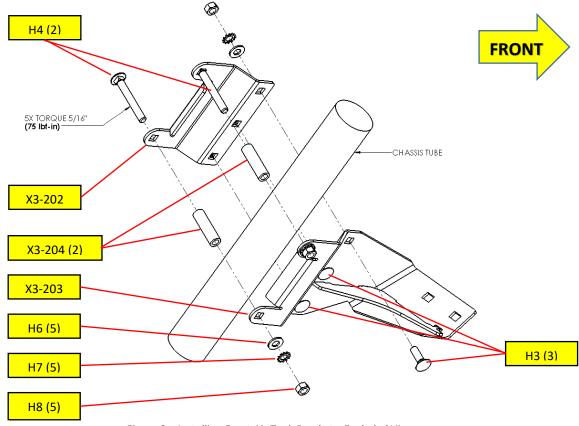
Installing Front Air Tank Brackets, Exploded View
